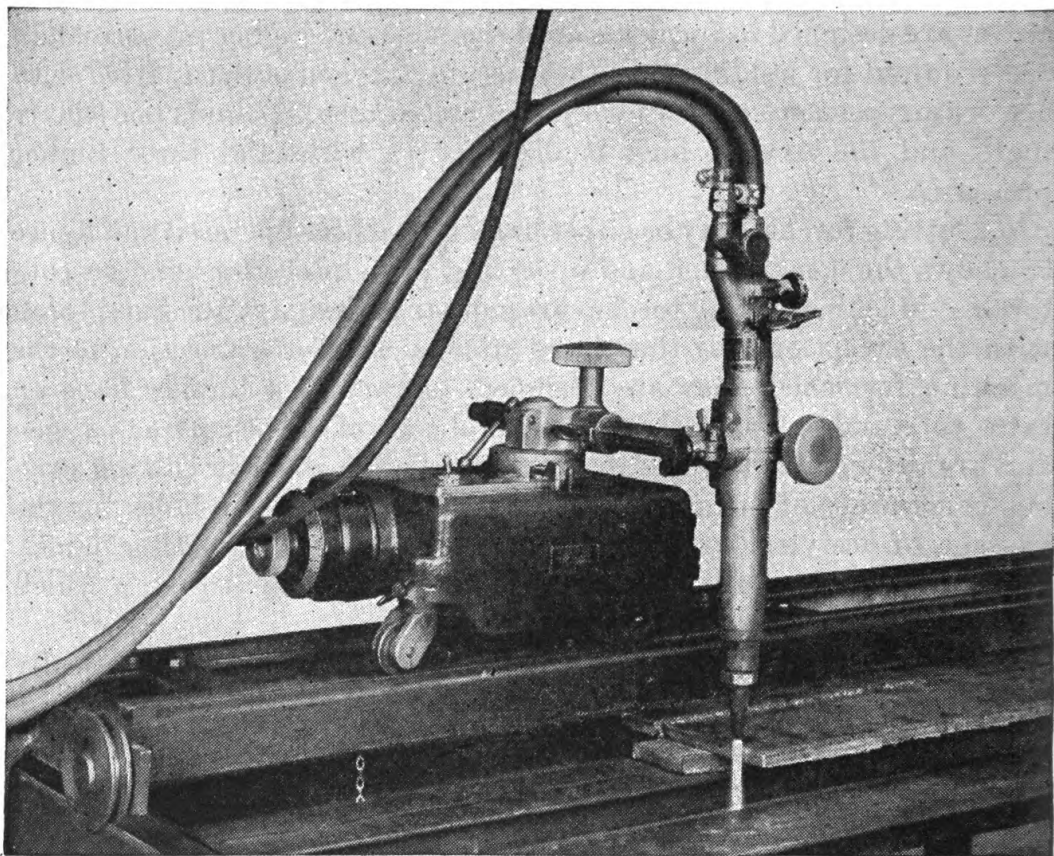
Motor-driven oxyacetylene cutting machine.
